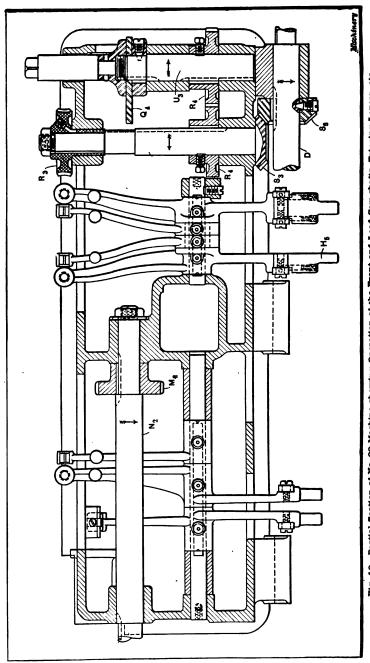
Partial Section of No. 00 Machine showing Operation of the Front and Leed Cam-shafts, Tripping Levers, etc.
